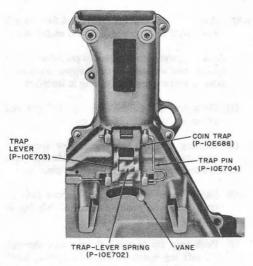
Trap-Lever Spring and Trap-Lever Assembly
